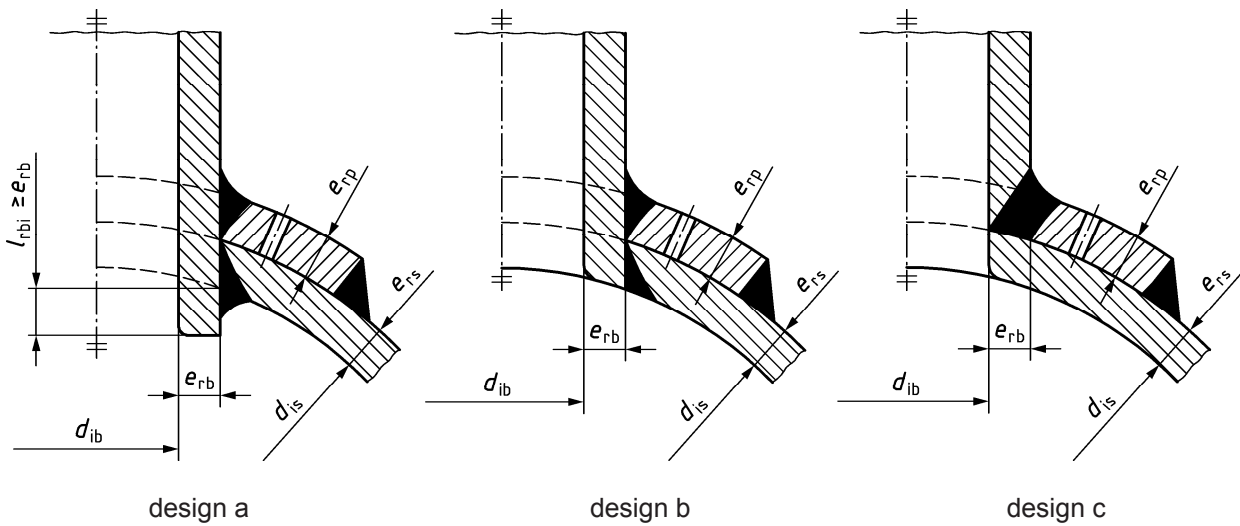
Opening with reinforcing pad and full penetration set-through and set on welded branch (welds shown for cylindrical shells accessible from the inside)
